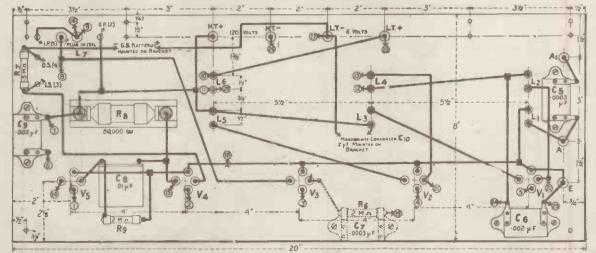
The wiring af the underside of the value panel, the lower edge being that which fits against the front panel. Blue print 94c.
